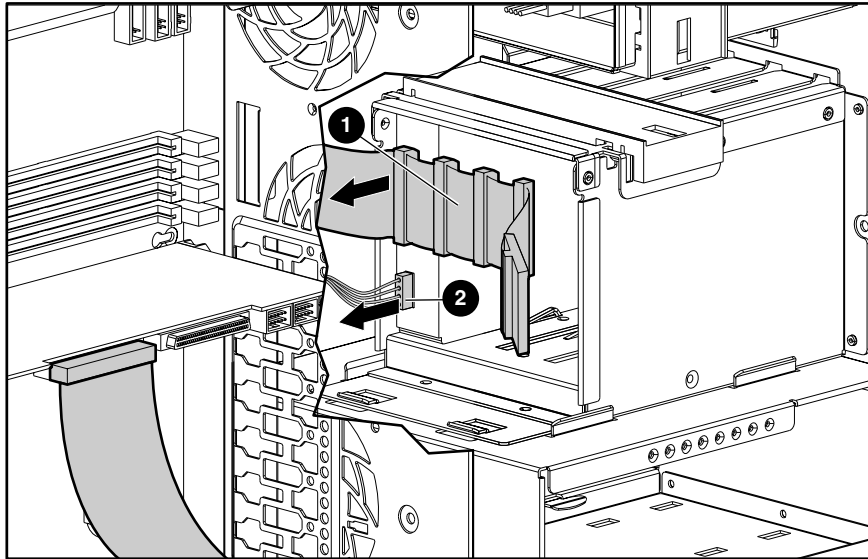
Disconnecting the non-hot-plug hard drive cables
